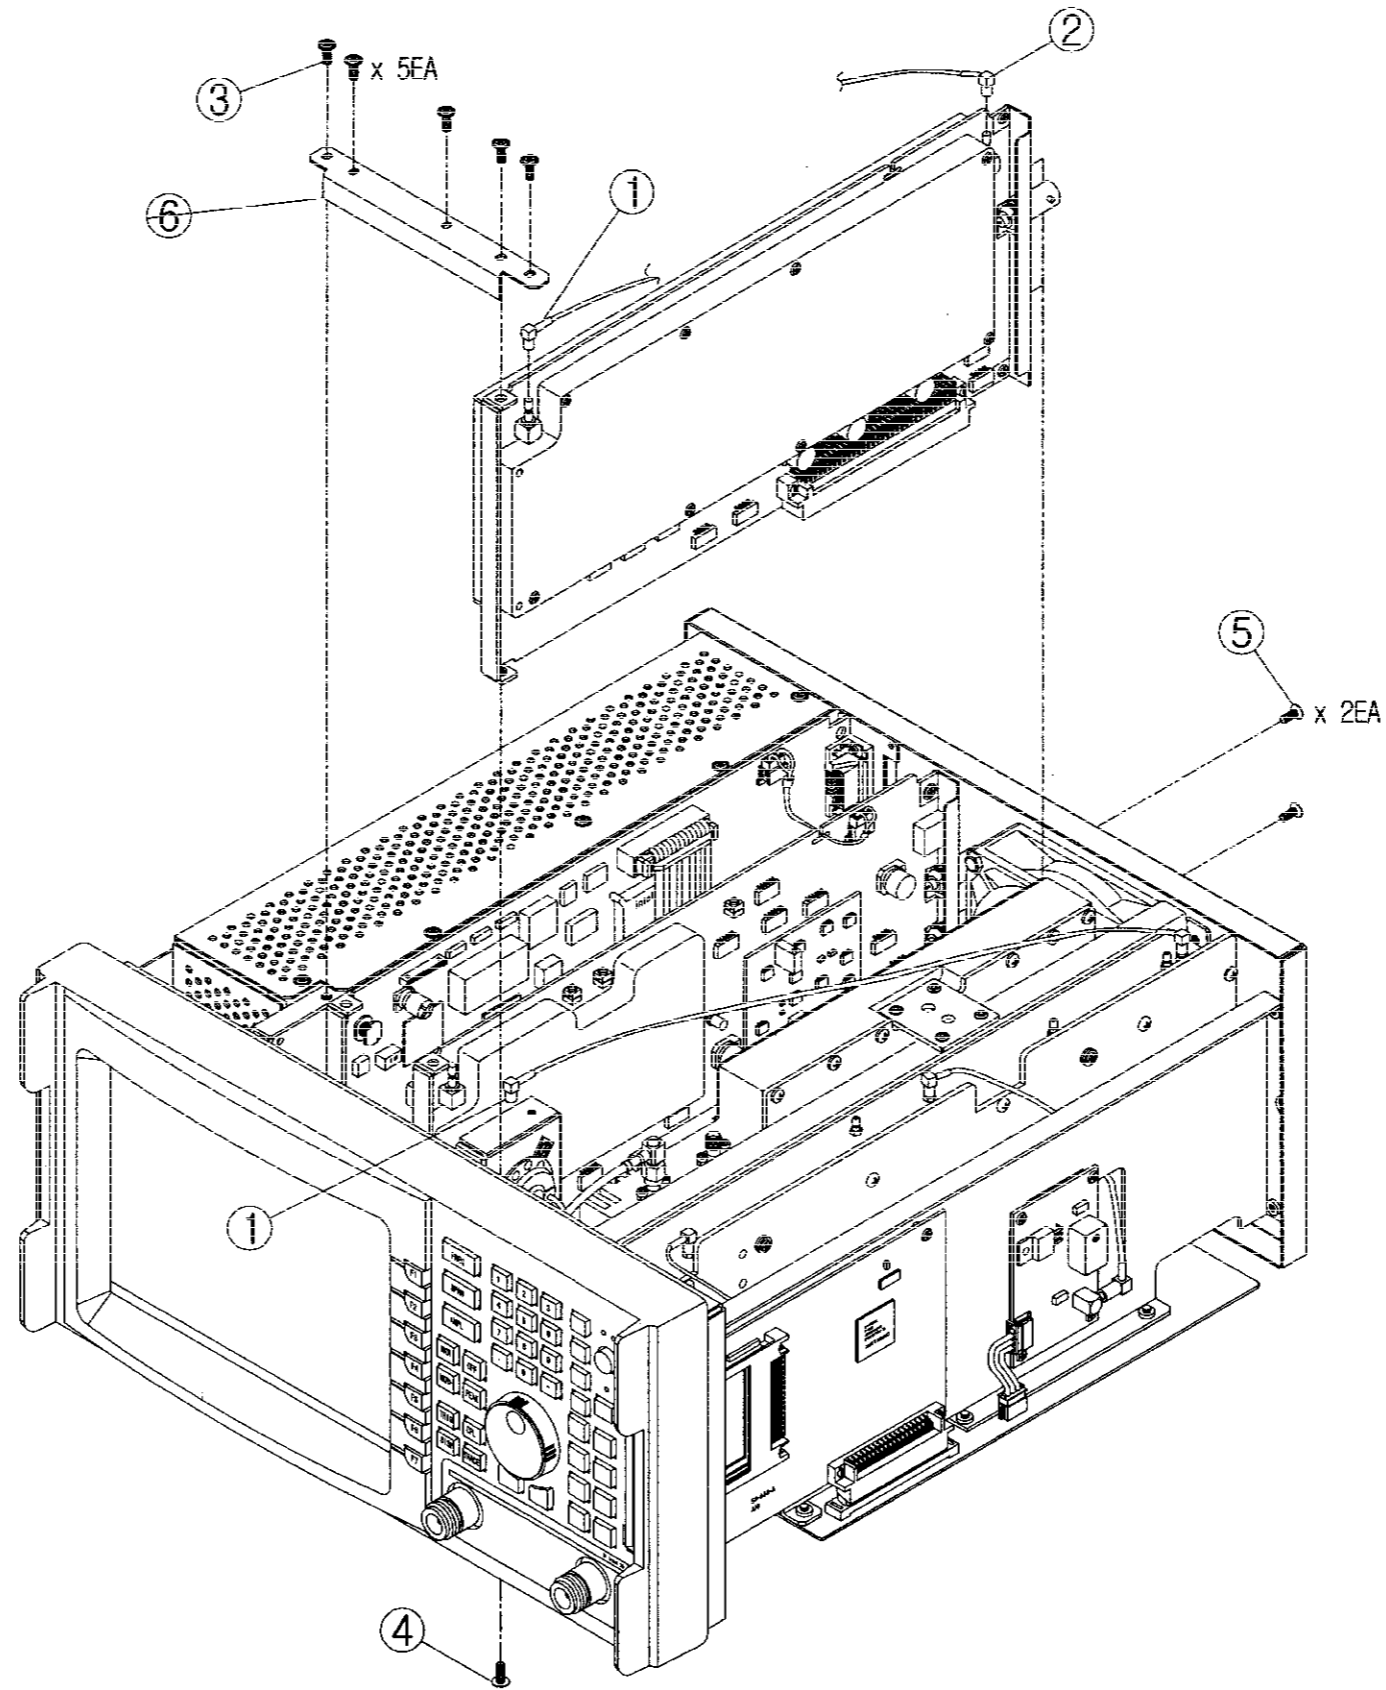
IF FILTER AND AMP BOARD ASSEMBLY 5-19
